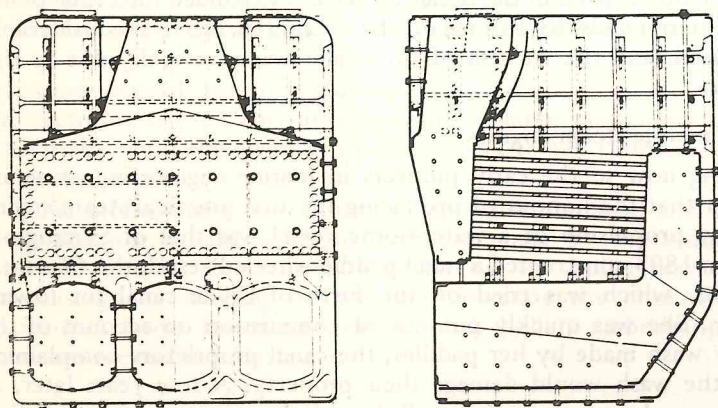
Box-type boilers fitted in vessel built by Thames Iron Works Co (1878)
